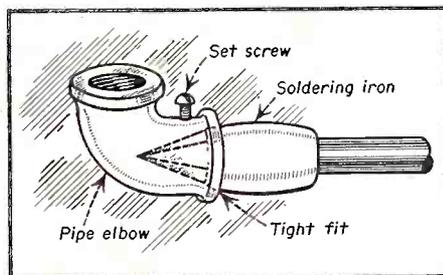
Solder pot made from pipe elbow which can be used for tinning wire ends.
